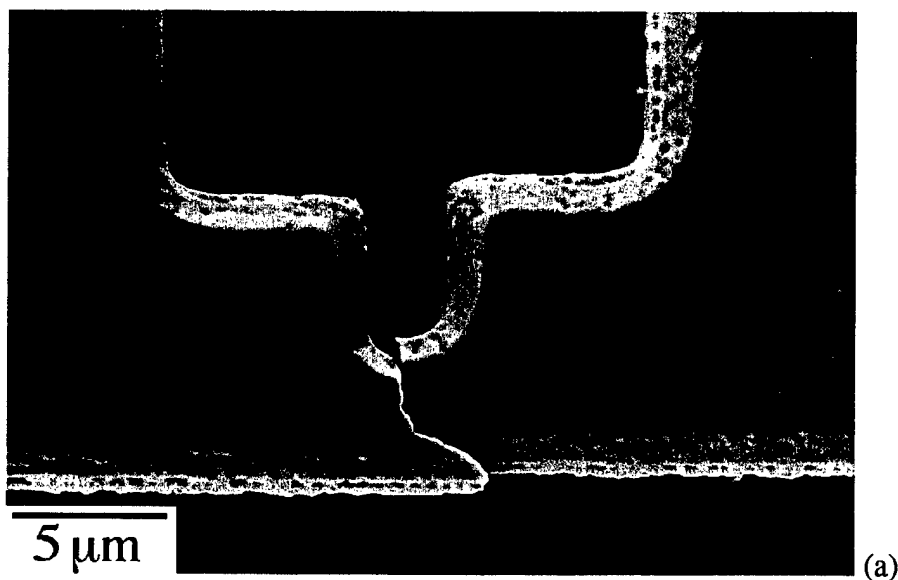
shows the top view of a fractured specimen. The crack path is significantly deflected; this was observed in most specimens. The fracture surface from a B-doped specimen, which fractured under monotonic loading at a deflection of  $7.9 \mu\text{m}$ , is shown in Figures 12b and 12c, and from an undoped specimen, which fractured under cyclic loading at a deflection of  $5.3 \mu\text{m}$ , in Figures 12d and 12e. (These were the two best examples of "classical" fracture features which were observed.) In both samples, a semi-
